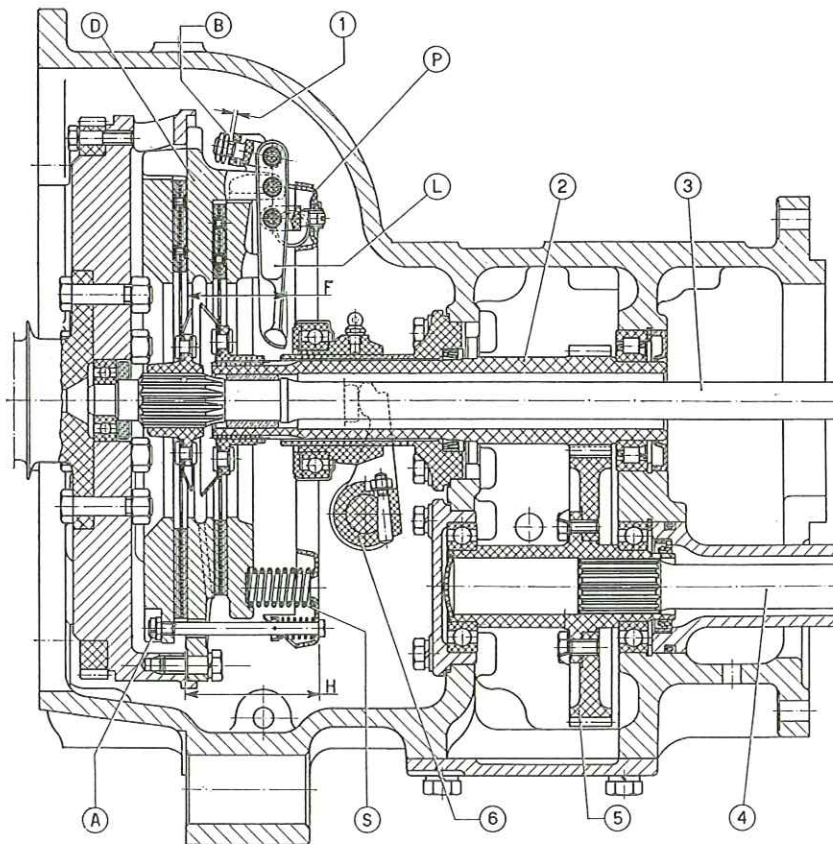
Cross-section of engine clutch and P.T.-O. drive gears.
